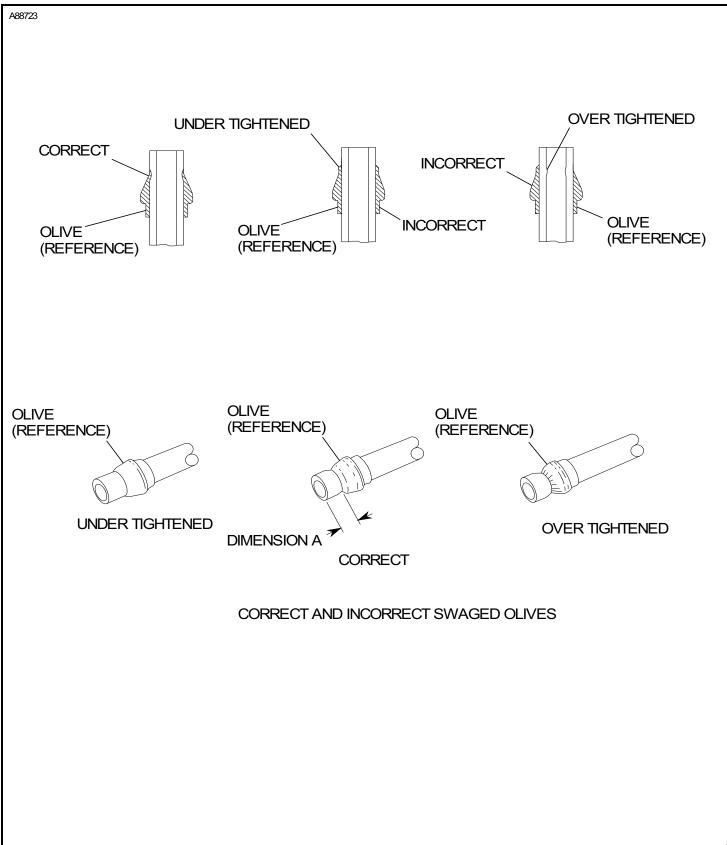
Sheet 2 : TKS Nylon Tubing Assembly
